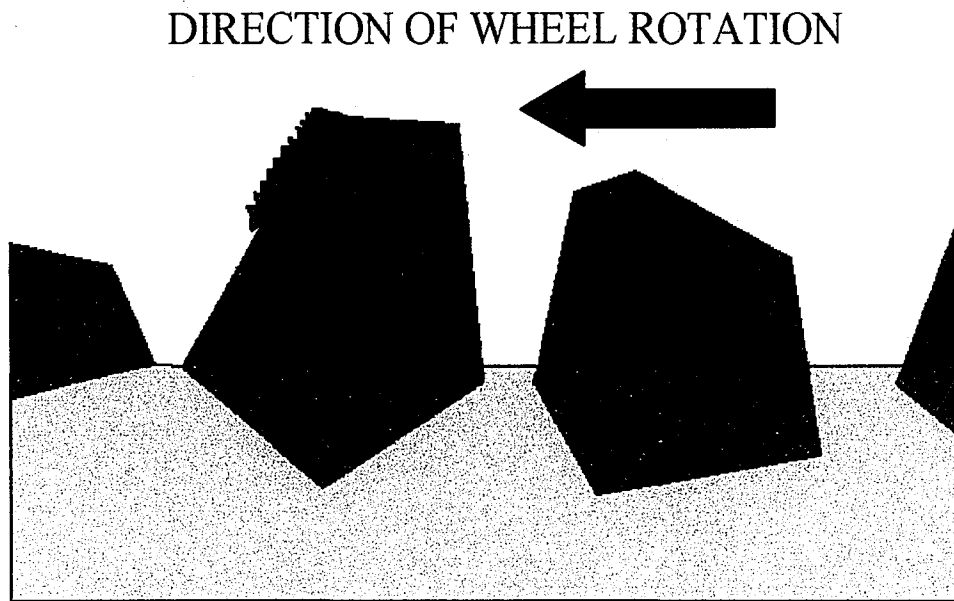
Adhesion of a grinding chip on the cutting face of a CBN grain.
